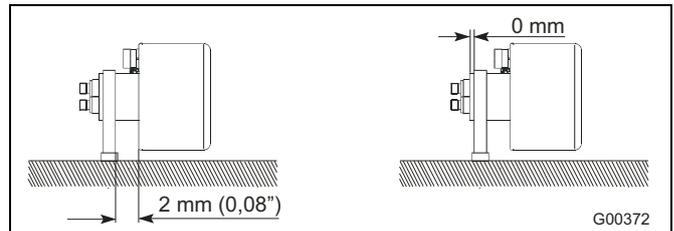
Installation DN 1.5 (1/16") – horizontal
